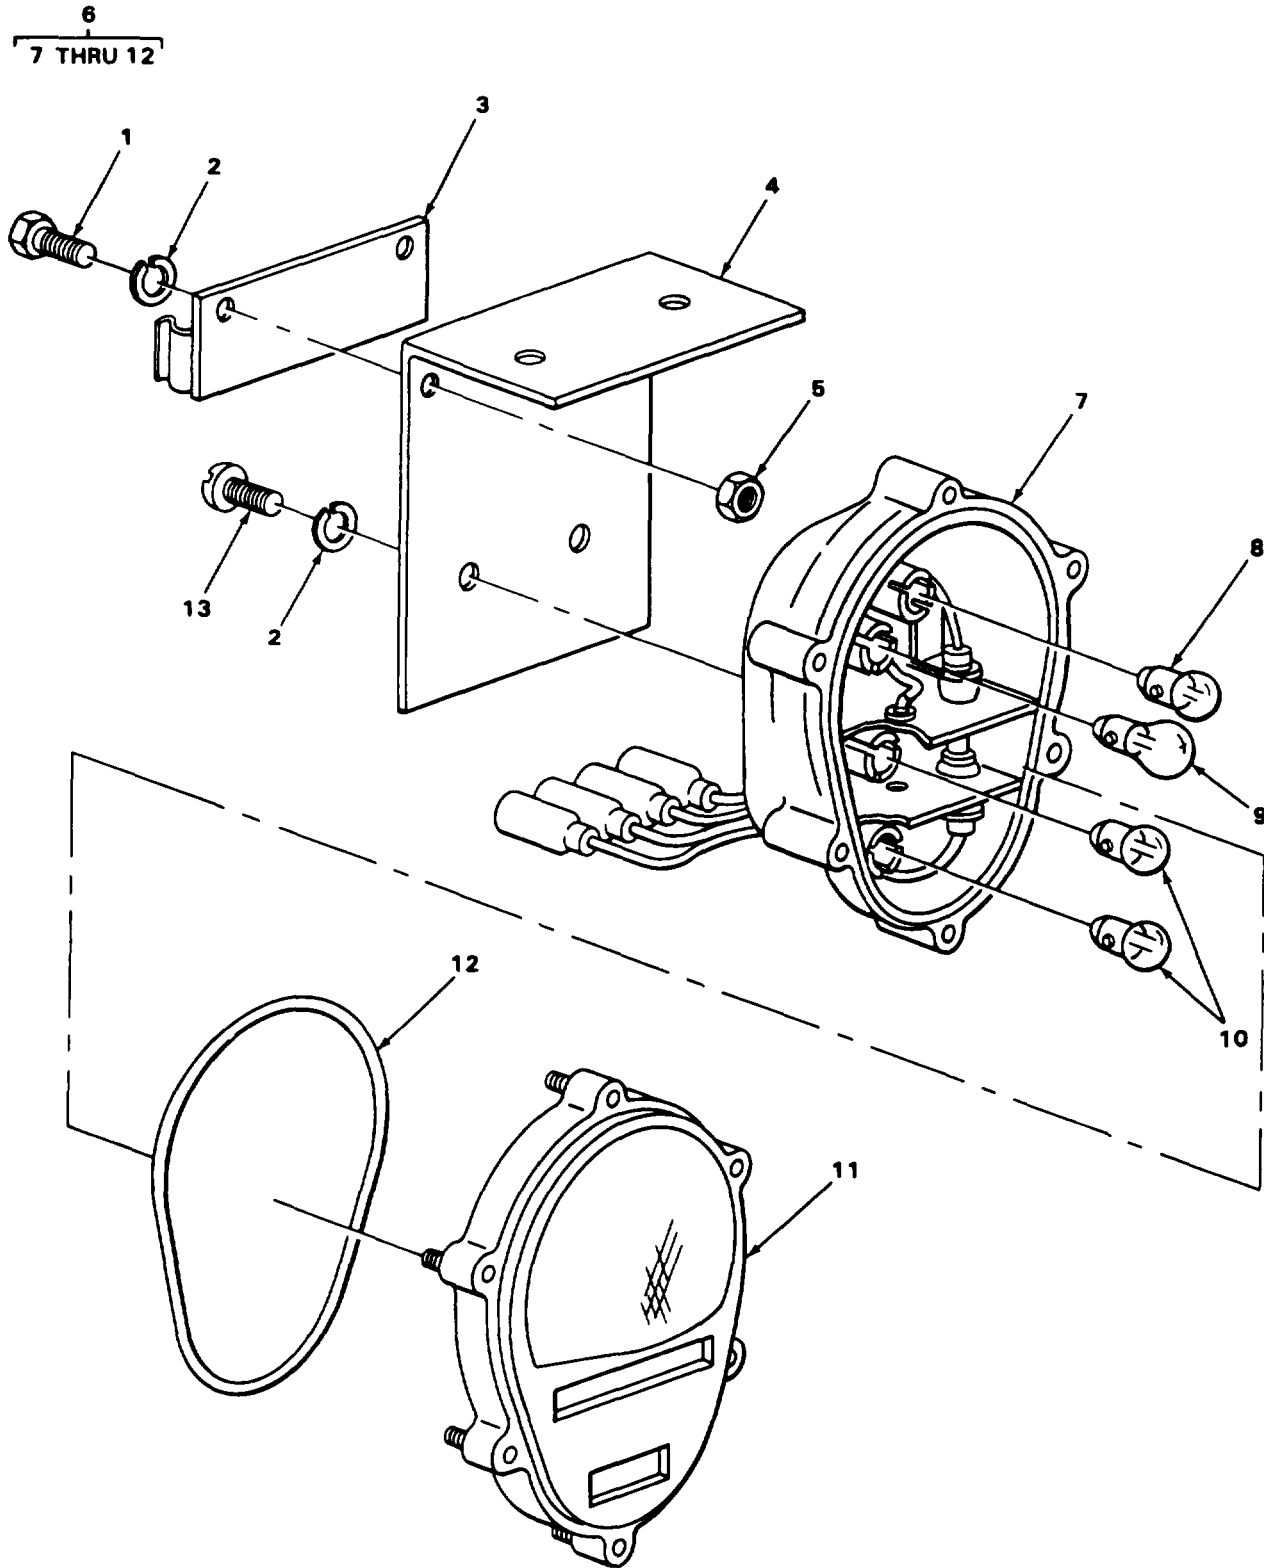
BLACKOUT STOPLIGHT ASSEMBLY (EARLY MODEL).
